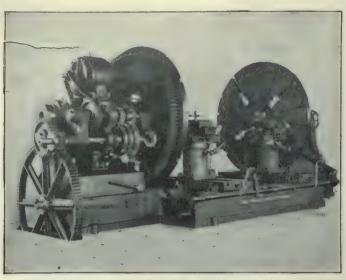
Lathe Drive from Motor by Silent Chain.
